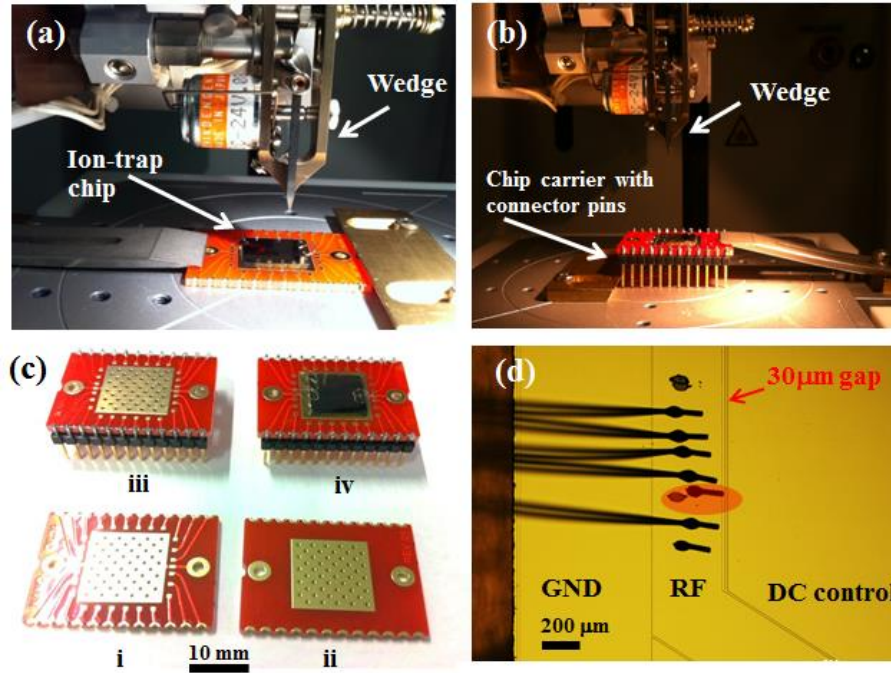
Photographs of wire-bonding process (die-to-package). (a) Wire-bonding before soldering connector pins. (b) Wire-bonding after soldering connector pins. (c) A customized chip carrier (DIL24): (i) front-side, (ii) backside, (iii) soldering connector pins, and (iv) a mounted ion-trap chip with wire-bonding. (d) Multiple-wires bonded to a narrow RF electrode pad to increase the current flow. The highlight (in red) shows a misaligned-bonded wire occasionally causing a short electrode.
